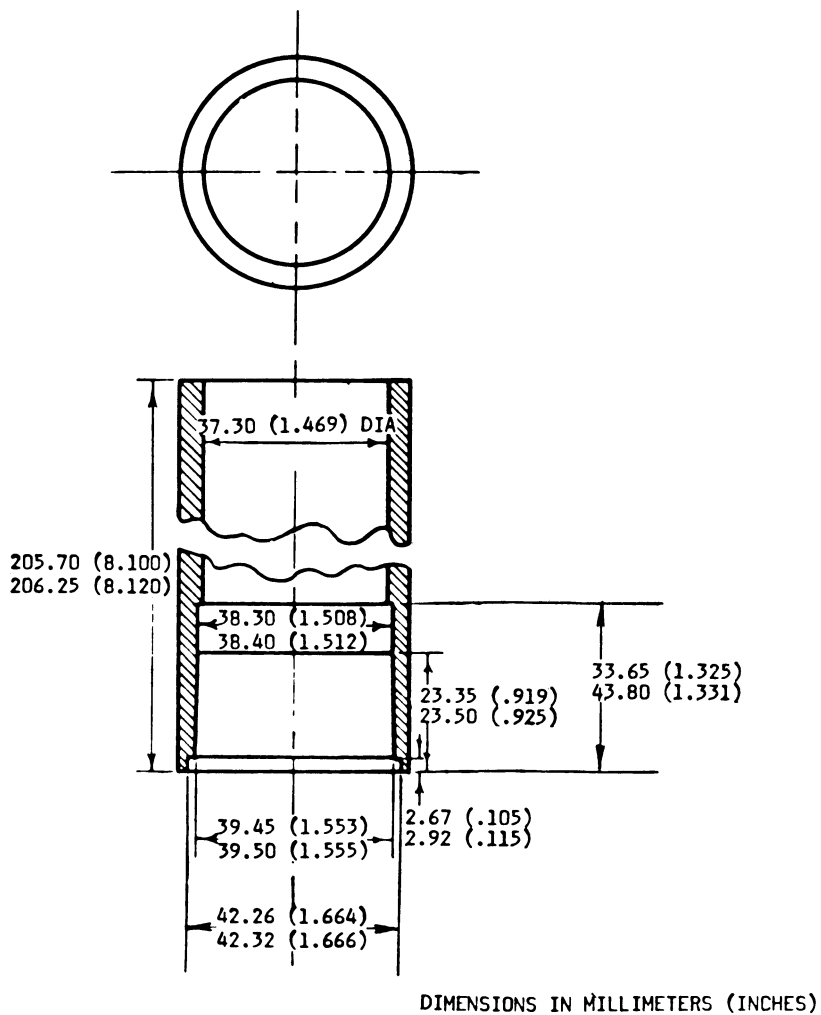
(a). Signal Pistol - Chamber and Bore Dimensions.
